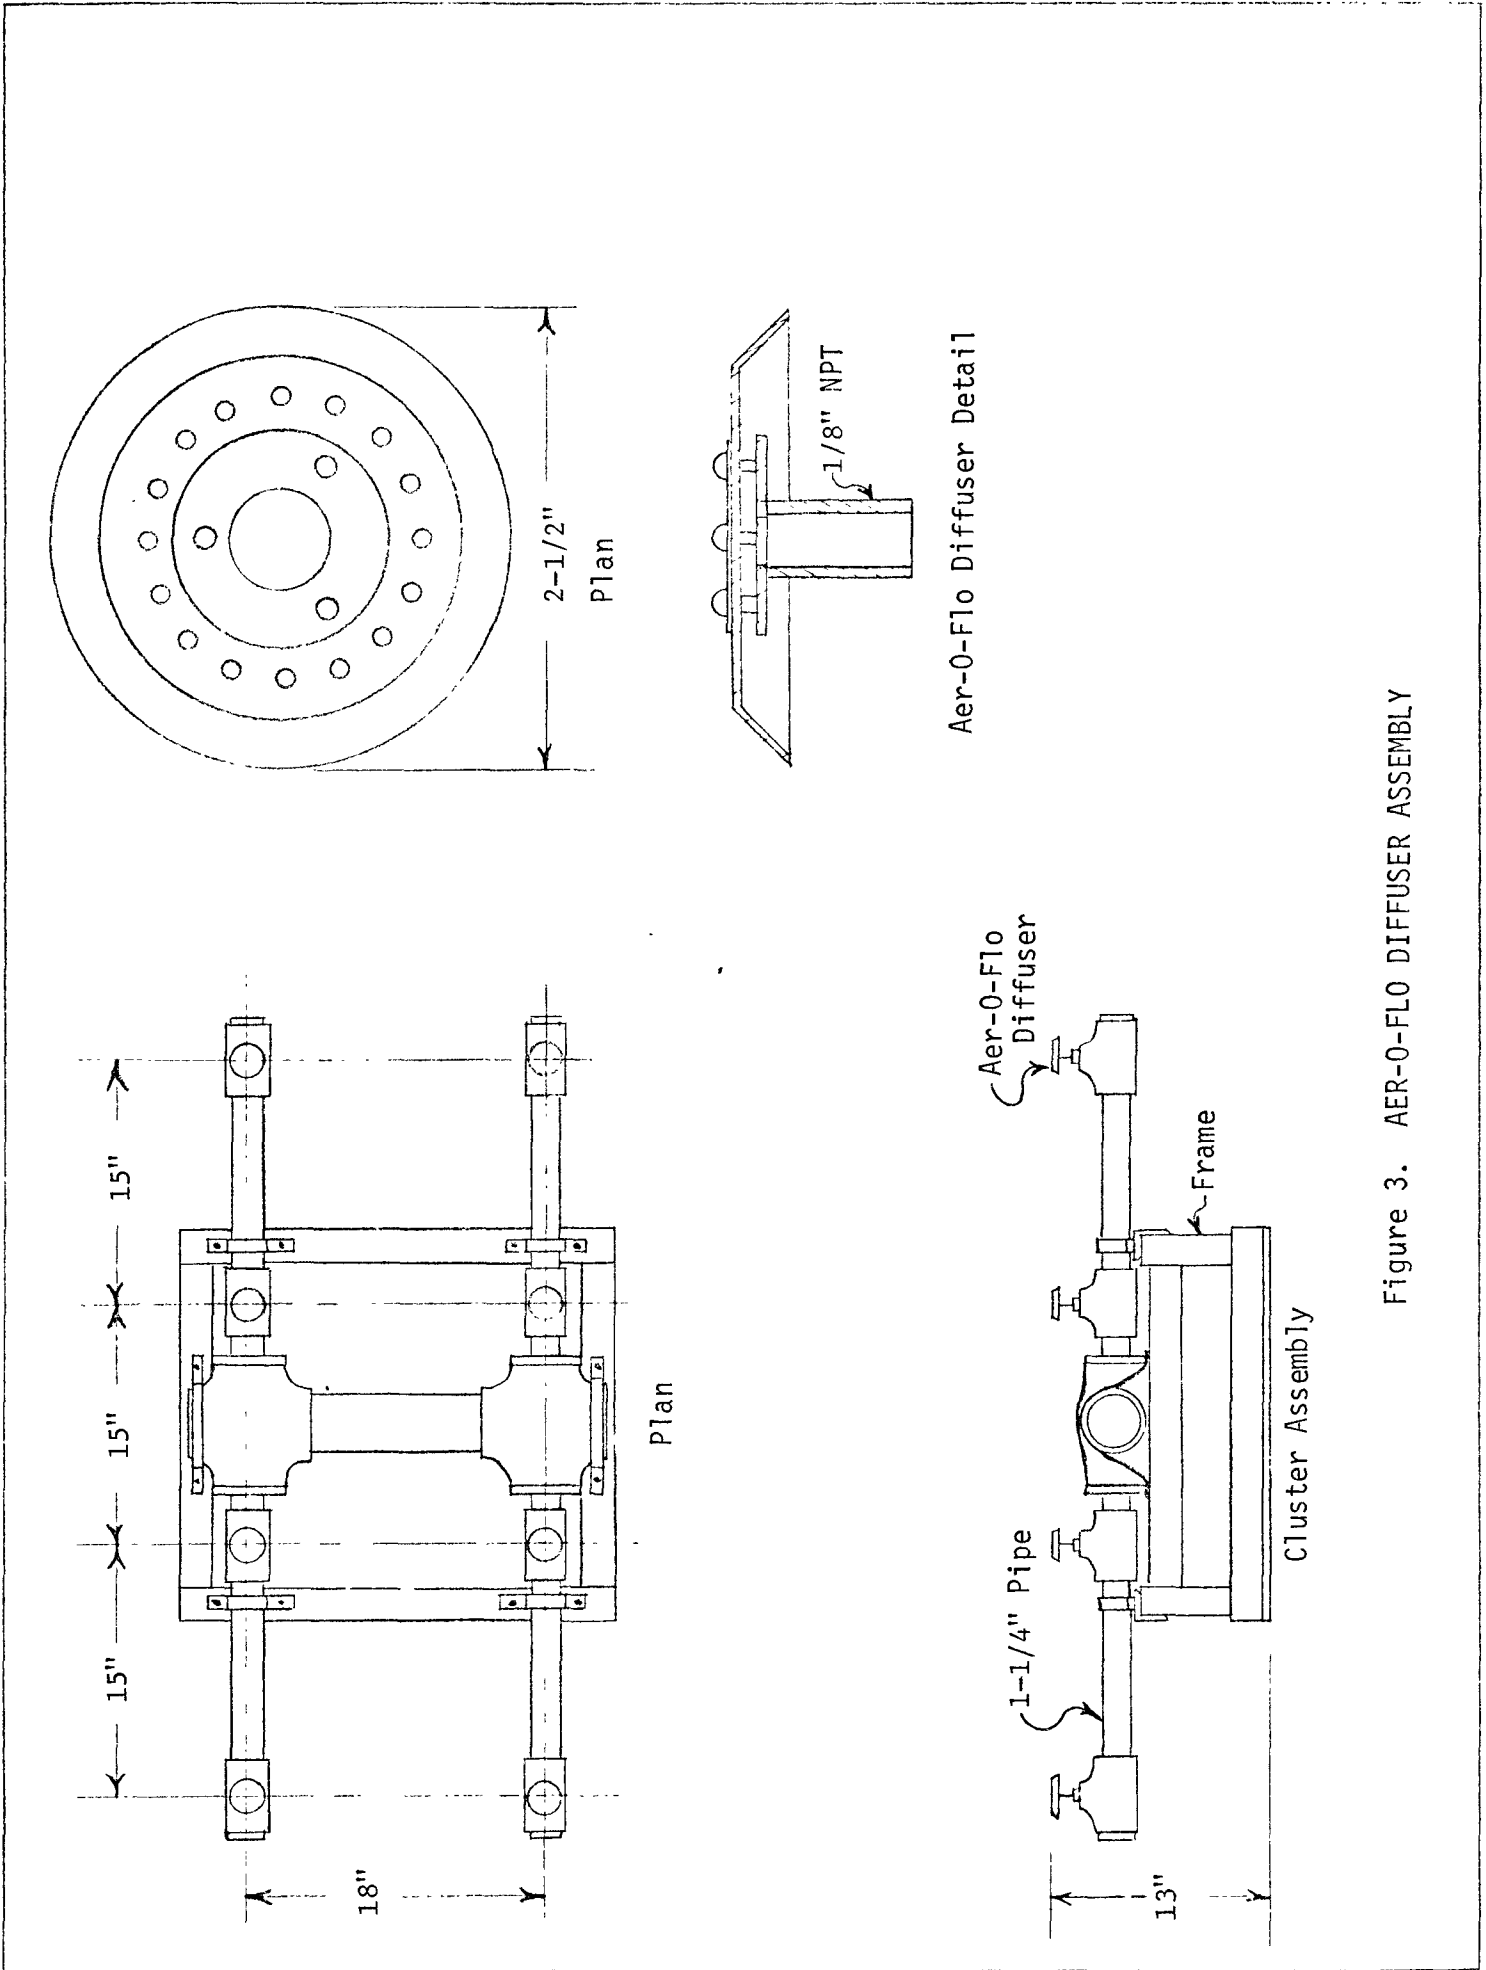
AER-0-FLO DIFFUSER ASSEMBLY
